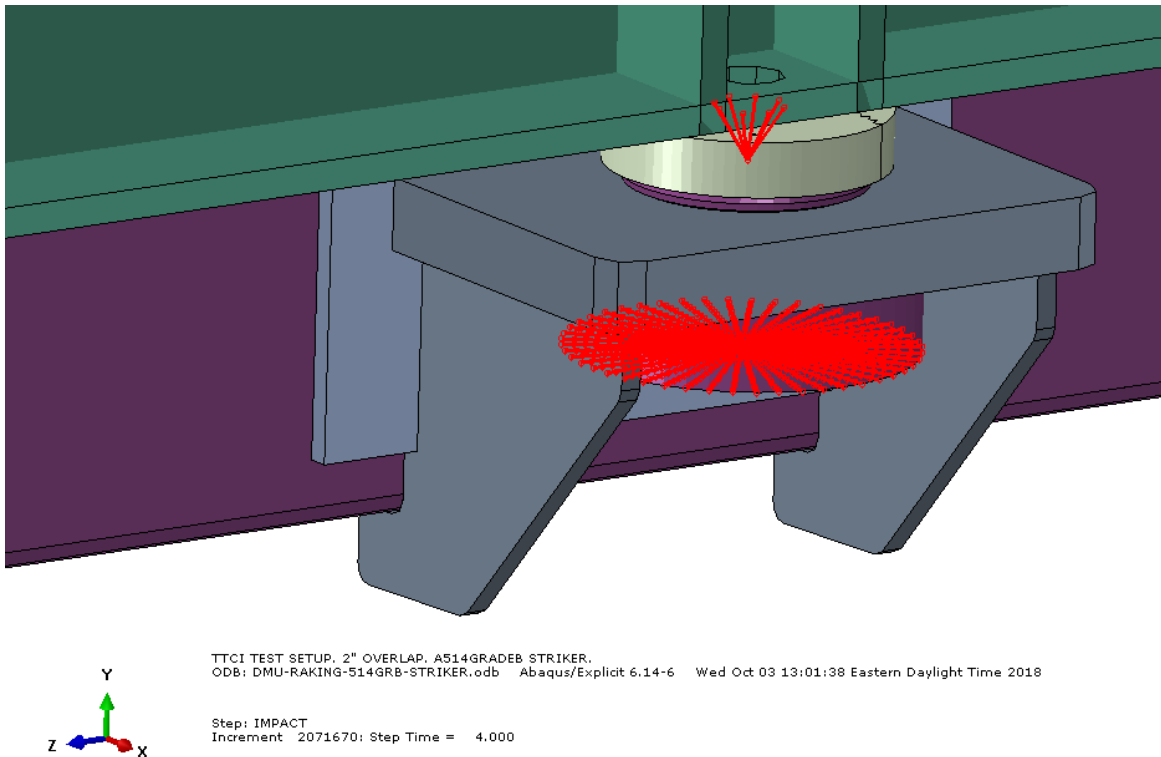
Typical Mounting Arrangement for Pre-test-1 Raking Model
